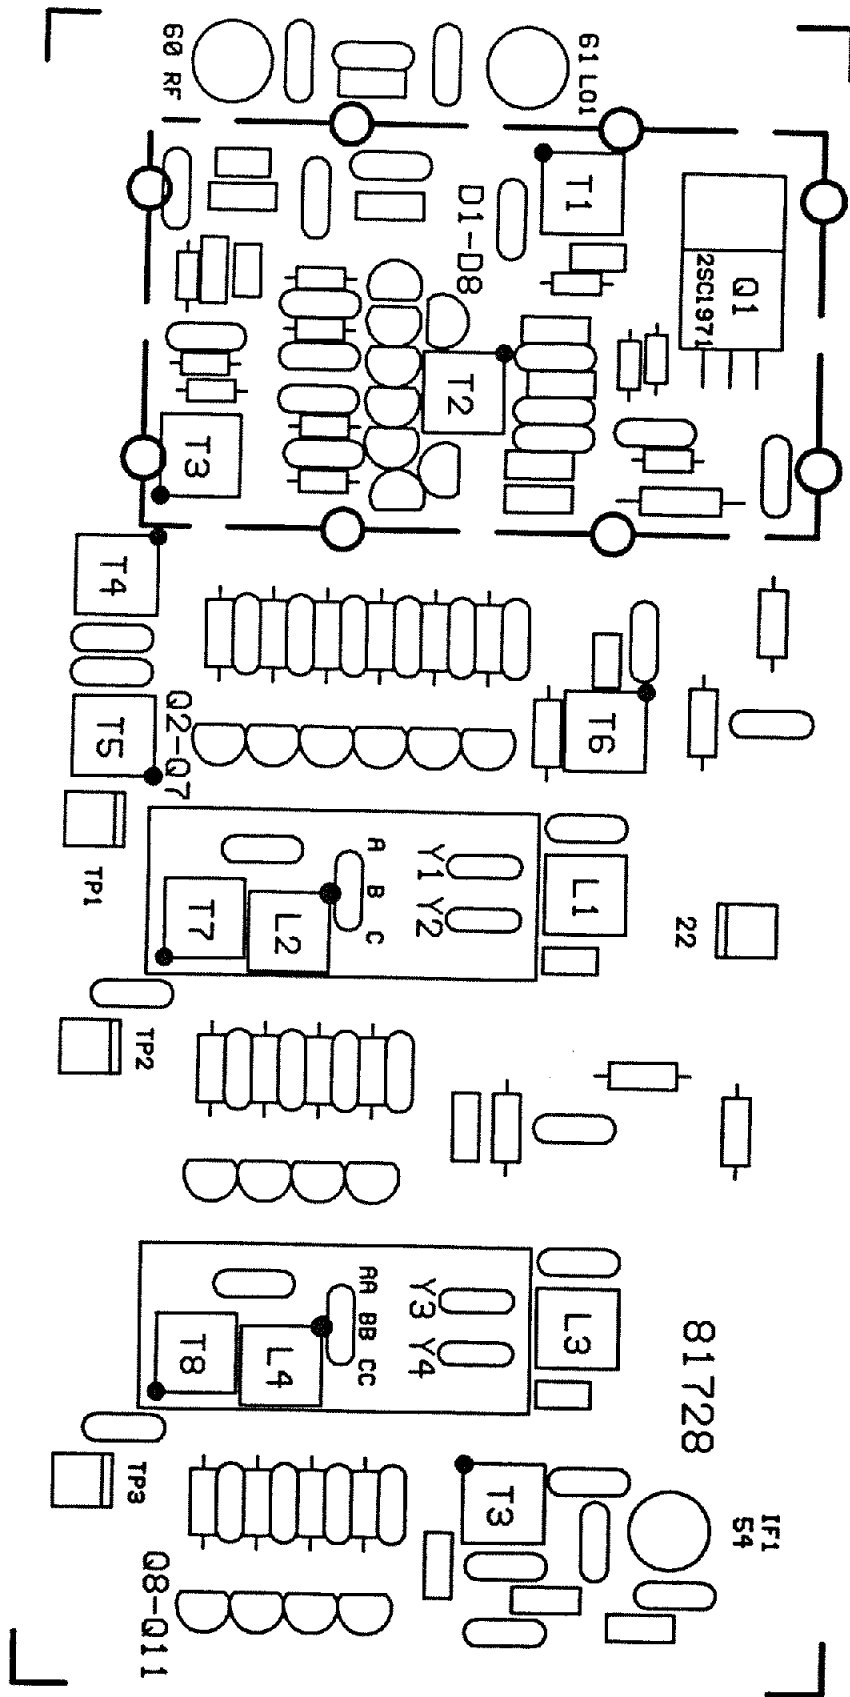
81728 1st MIXER COMPONENT LAYOUT
